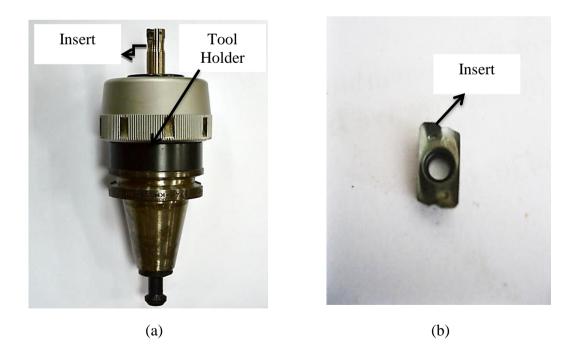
(a) tool holder and cutting tool insert, (b) insert coated carbide tool
